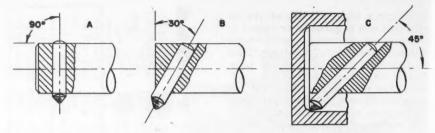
(A) Most Common Type of Diamond Mounting; 90-Deg. Angle (B) If Clearance at End of Boring Bar is Necessary, Shank is Set at 30-Deg. Angle. (C) If a Square Corner is Specified at Bottom of Hole, Shank Must be Set at 45-Deg. Angle
